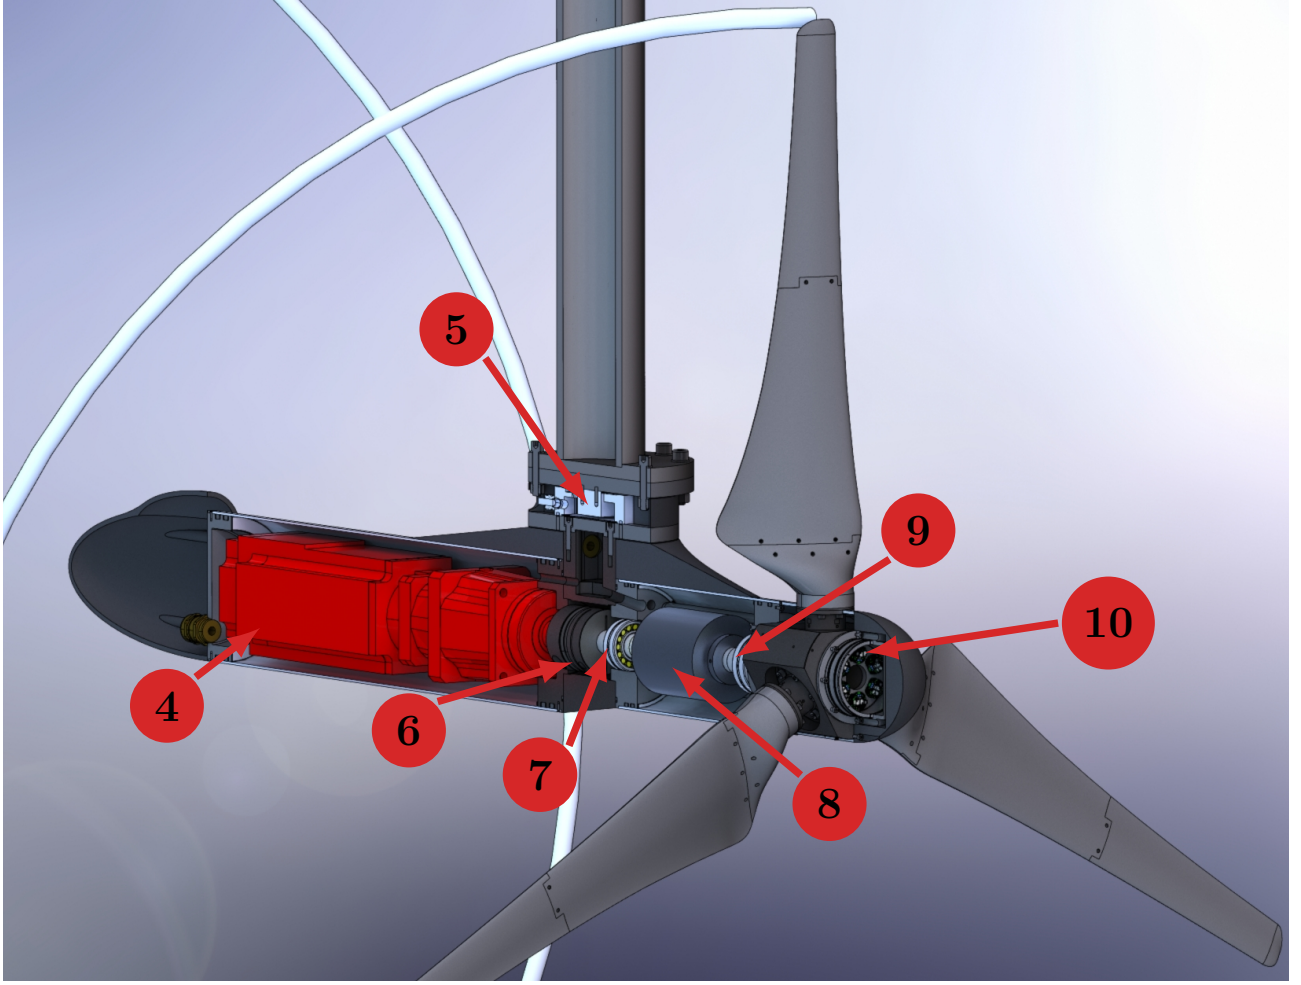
Section view of the turbine including identifiers for main drive train components. (4) Drive unit, including holding break, encoder, servo motor with planetary gear. (5) Three-component thrust gauge. (6) Metal bellows coupling. (7) Self-aligning roller bearing (floating). (8) Slip ring. (9) Self-aligning roller bearing (fixed). (10) Root bending strain gauge amplifiers. Drive train components listed in Table 3.2, Sensors listed in Table 3.3.
